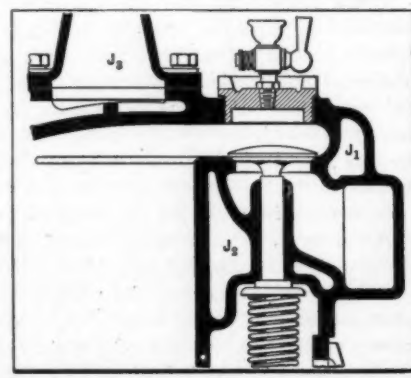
Showing water cooling around valve head with the metal of uniform thickness
